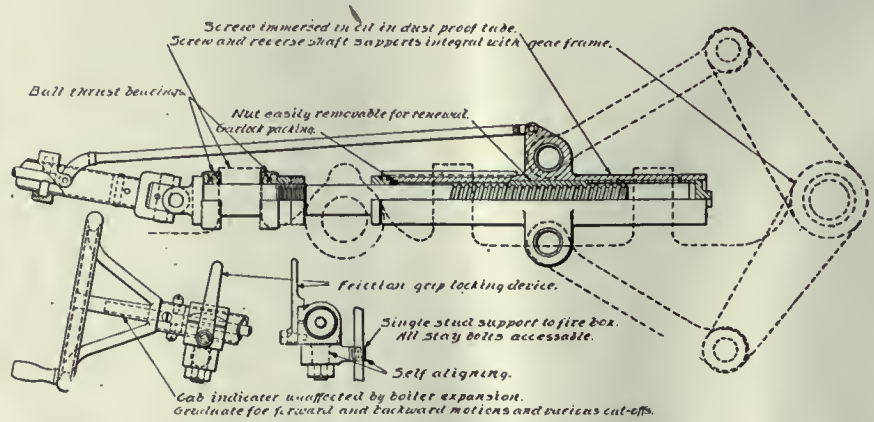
SECTION VIEW OF THE REVERSE GEAR.
